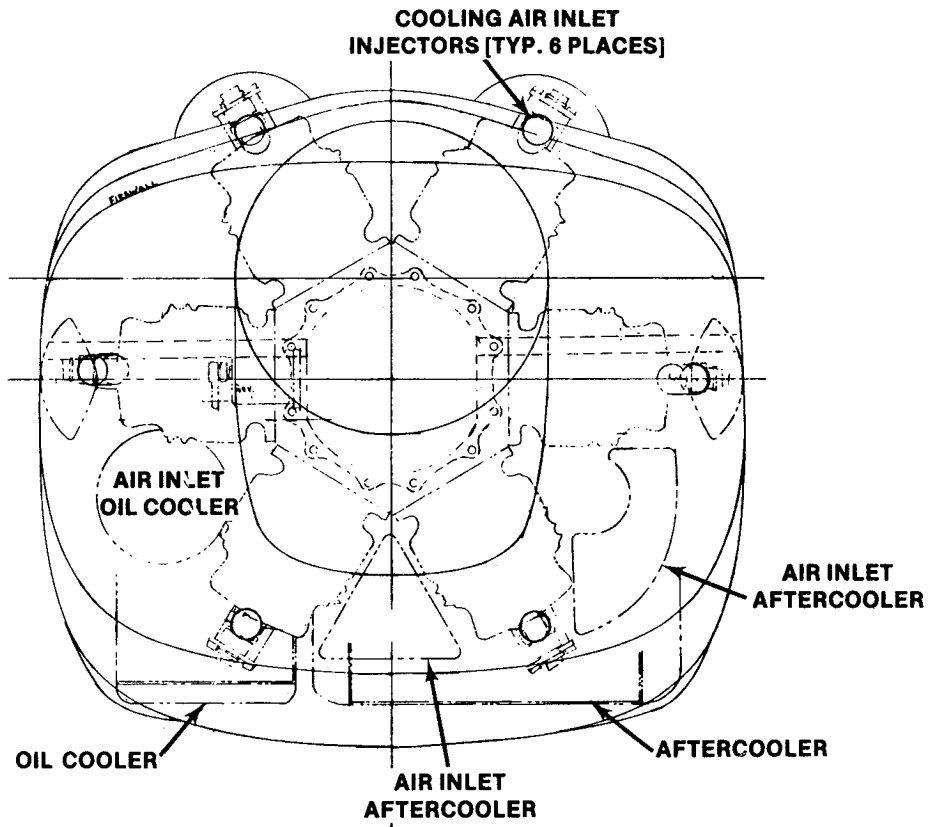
FRONT VIEW TWIN INSTALLATION
